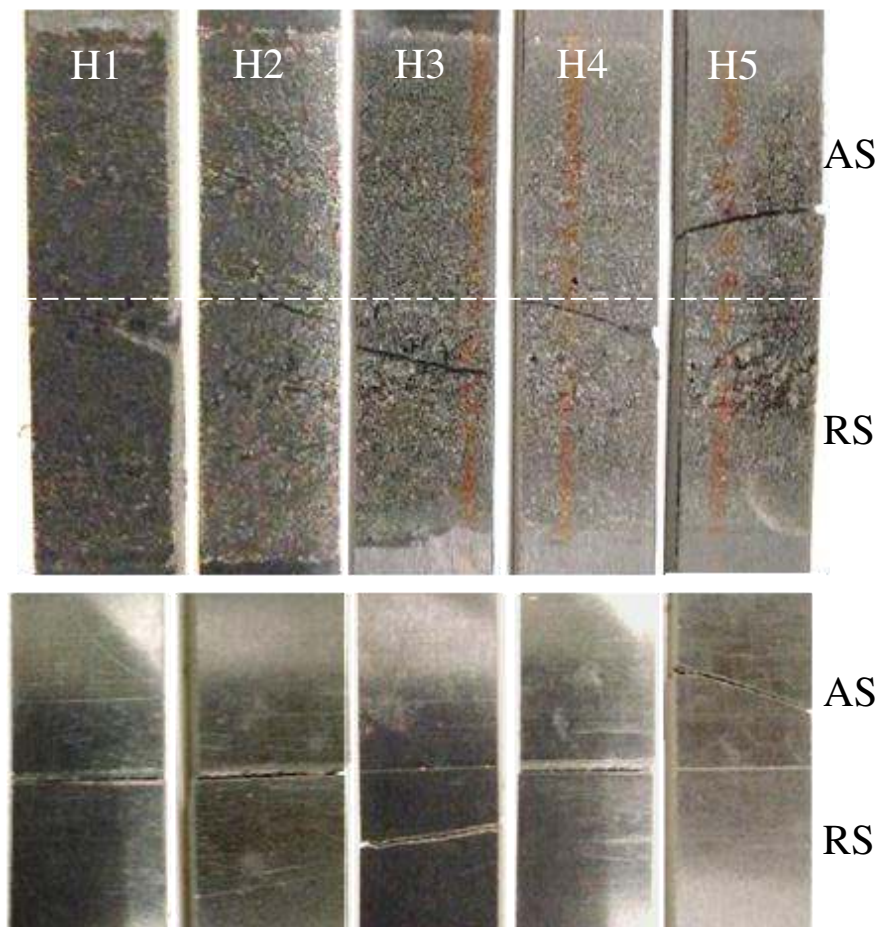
Fractured specimens H1 to H5 top view (left) and bottom view (right).
